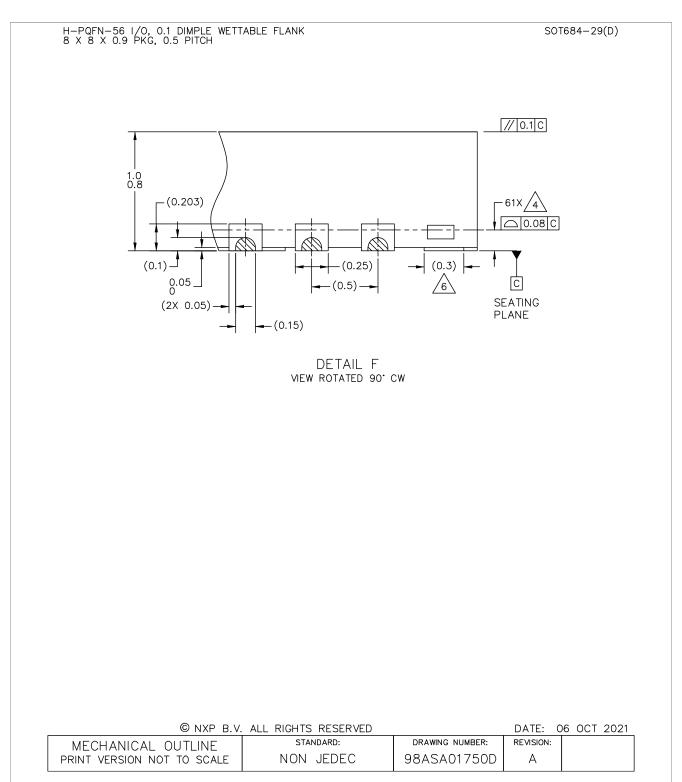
Package outline detail for dimple WF-type HVQFN56 (automotive/industrial grade)
